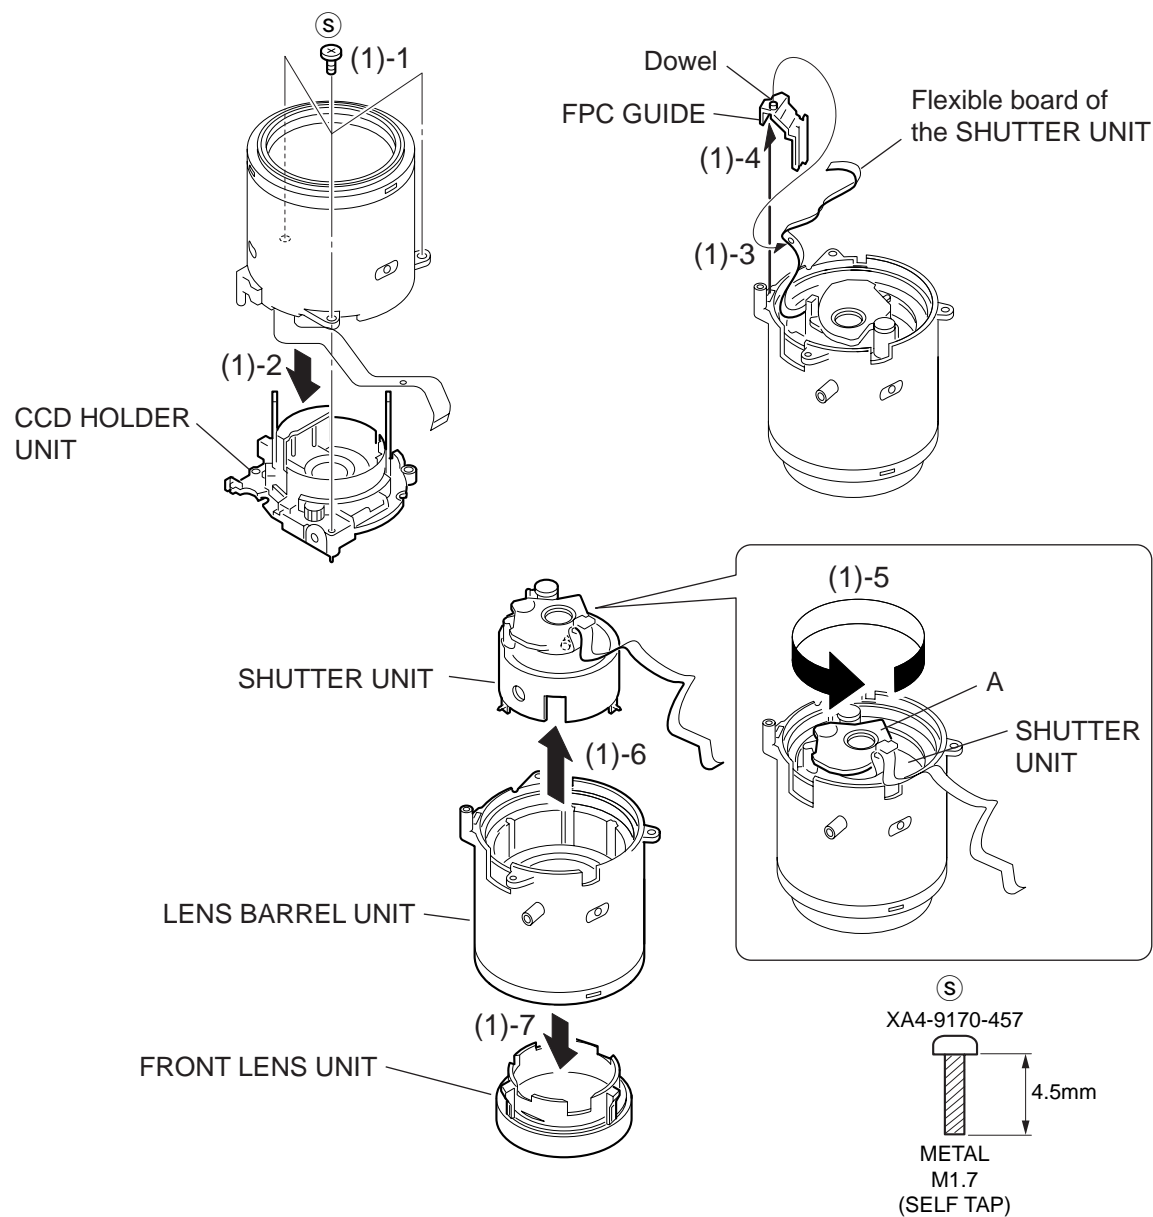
CCD HOLDER,SHUTTER UNIT
